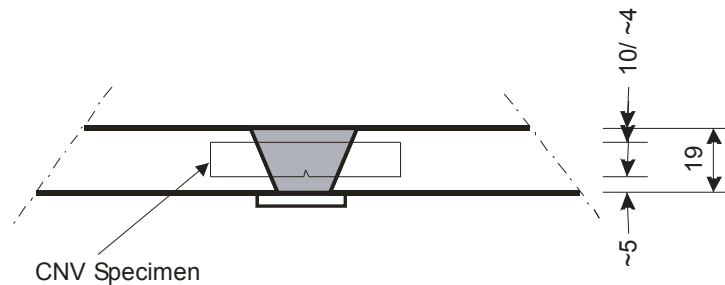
CVN coupons machined from the welded plates (dimensions in mm).
